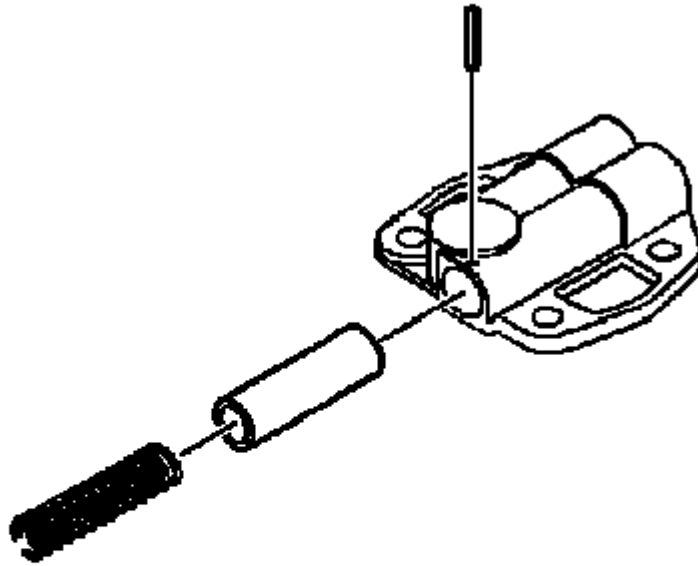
View Of Oil Pump Pressure Relief Valve, Spring & Spring Straight Pin
